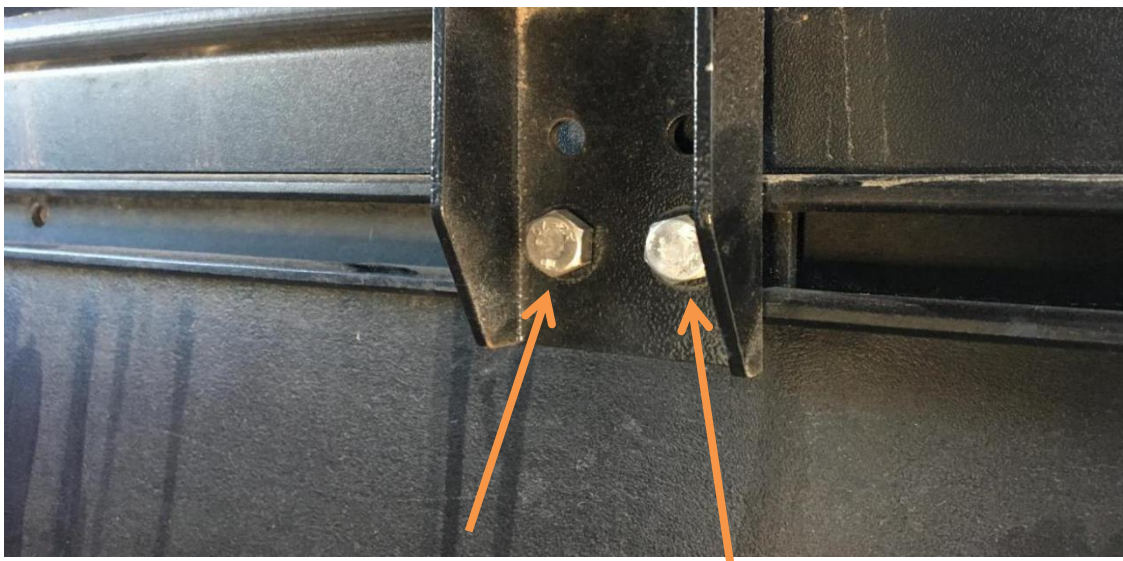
You will fasten through these holes with 2 Button Head Bolt, Flat Washers and Spring Washers
